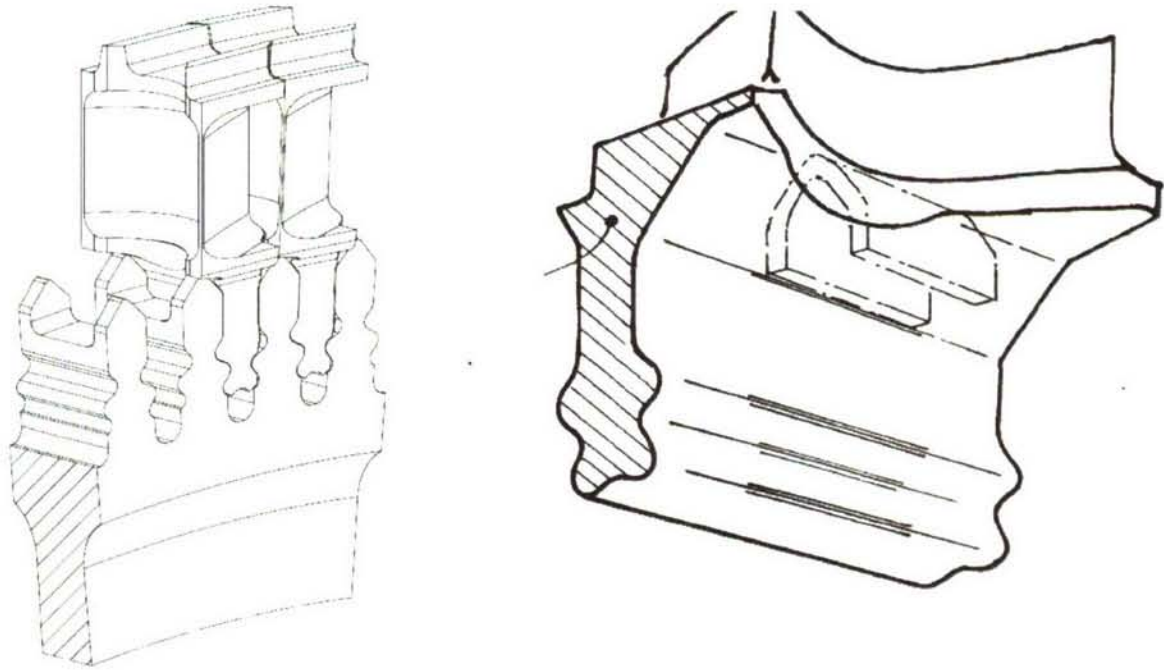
Turbine blade sketch with cottage roof platform damper from [11]
